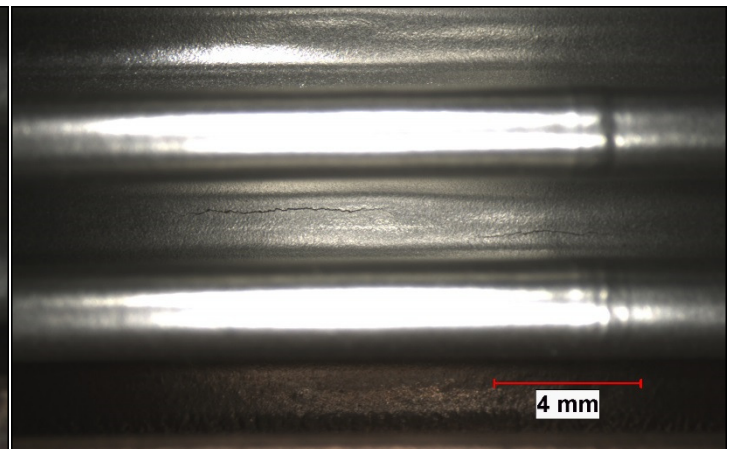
Another set of two cracks on the opposite end of the bellow 180° from the other cracks and adjacent to the weld seam.
